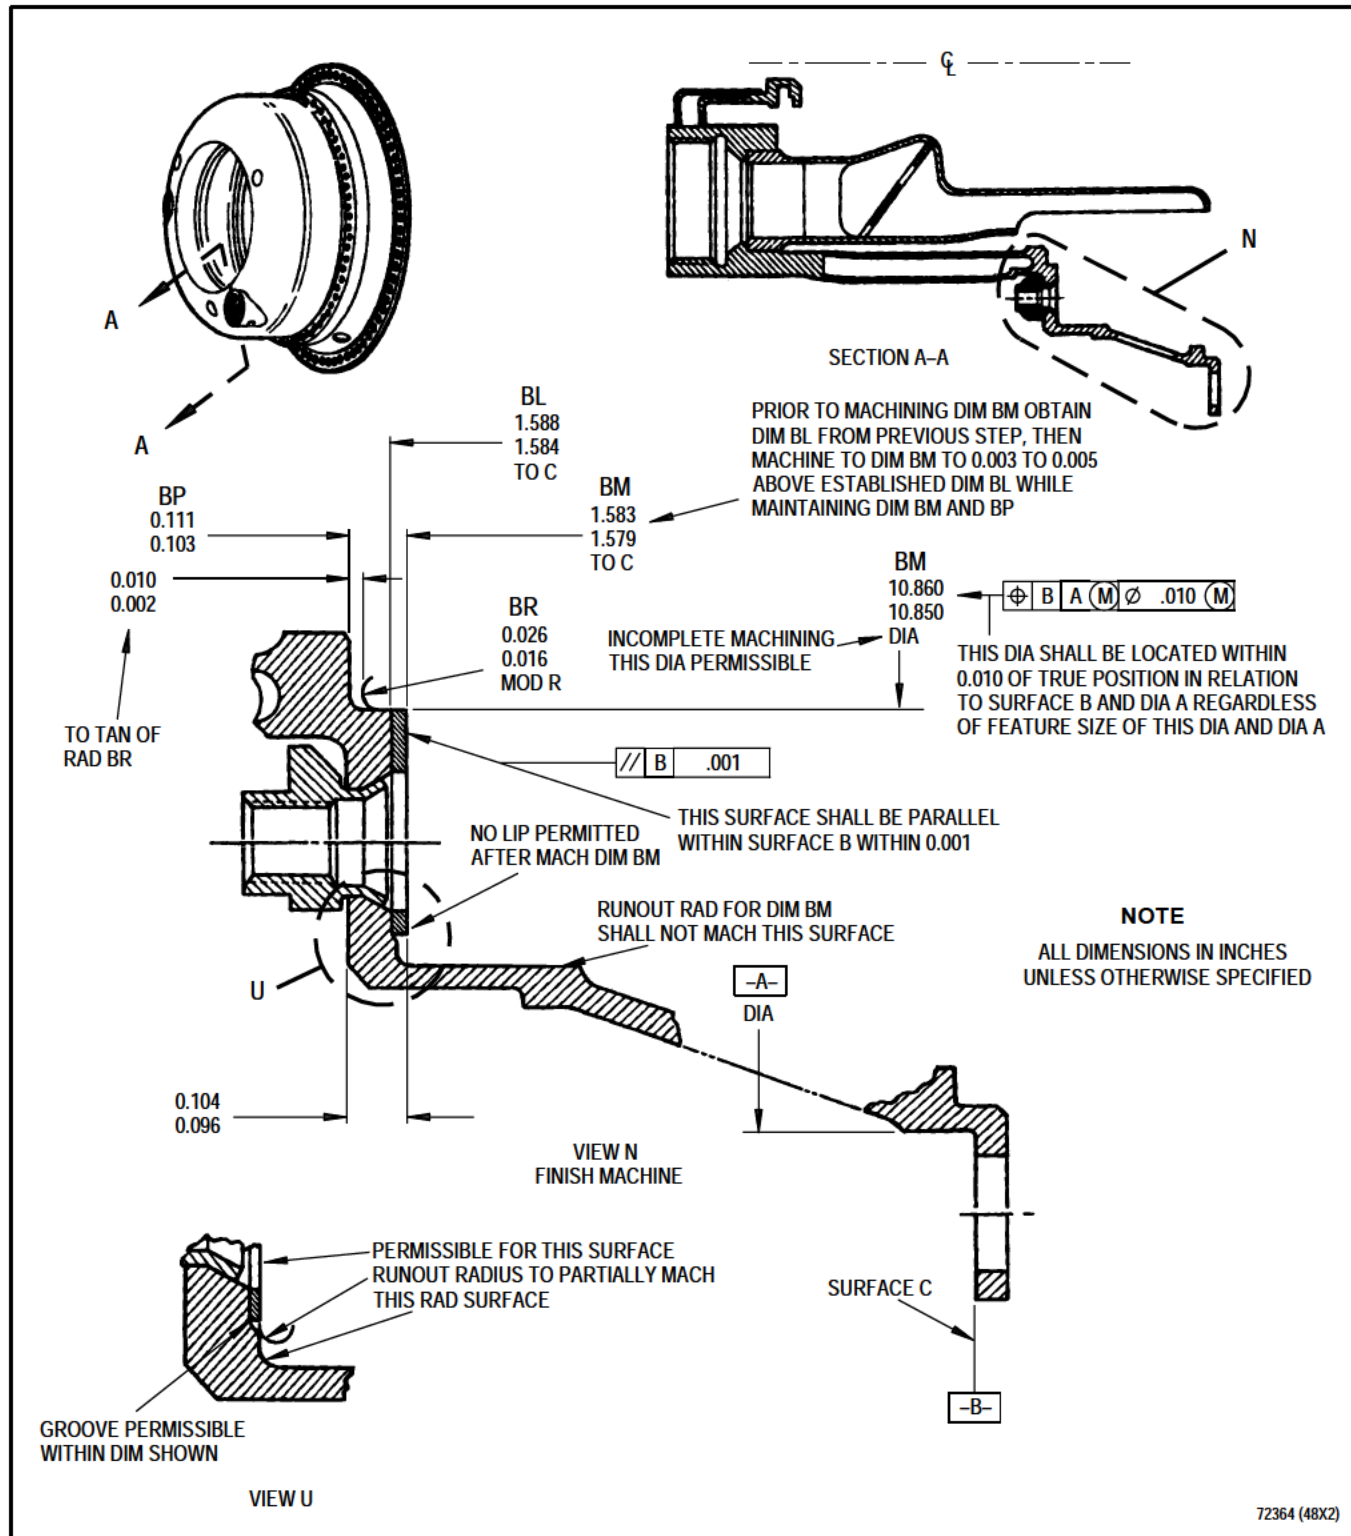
No. 4 Bearing Front Seal Support Assembly - Rear Mating Face Plasma Spray
